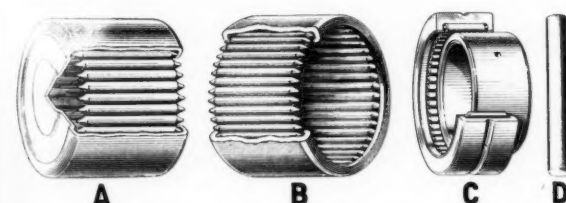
Three common types of needle bearings: (A and B) Torrington closed-end and open end, drawn-cup needle bearings, respectively; and (C) the heavy race or NCS-type of needle bearing. (D) Spherical end roller, used in transmissions, etc.
